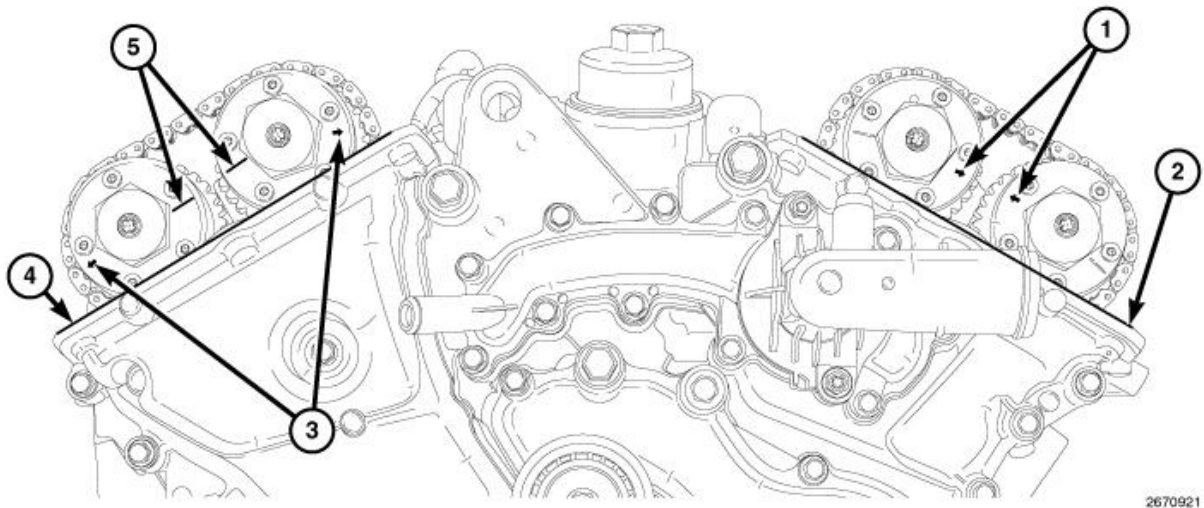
Arrows, Scribe Lines, & Cam Phasers
